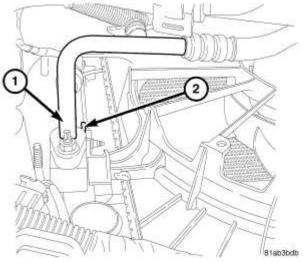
Identifying A/C Line Courtesy of CHRYSLER LLC
